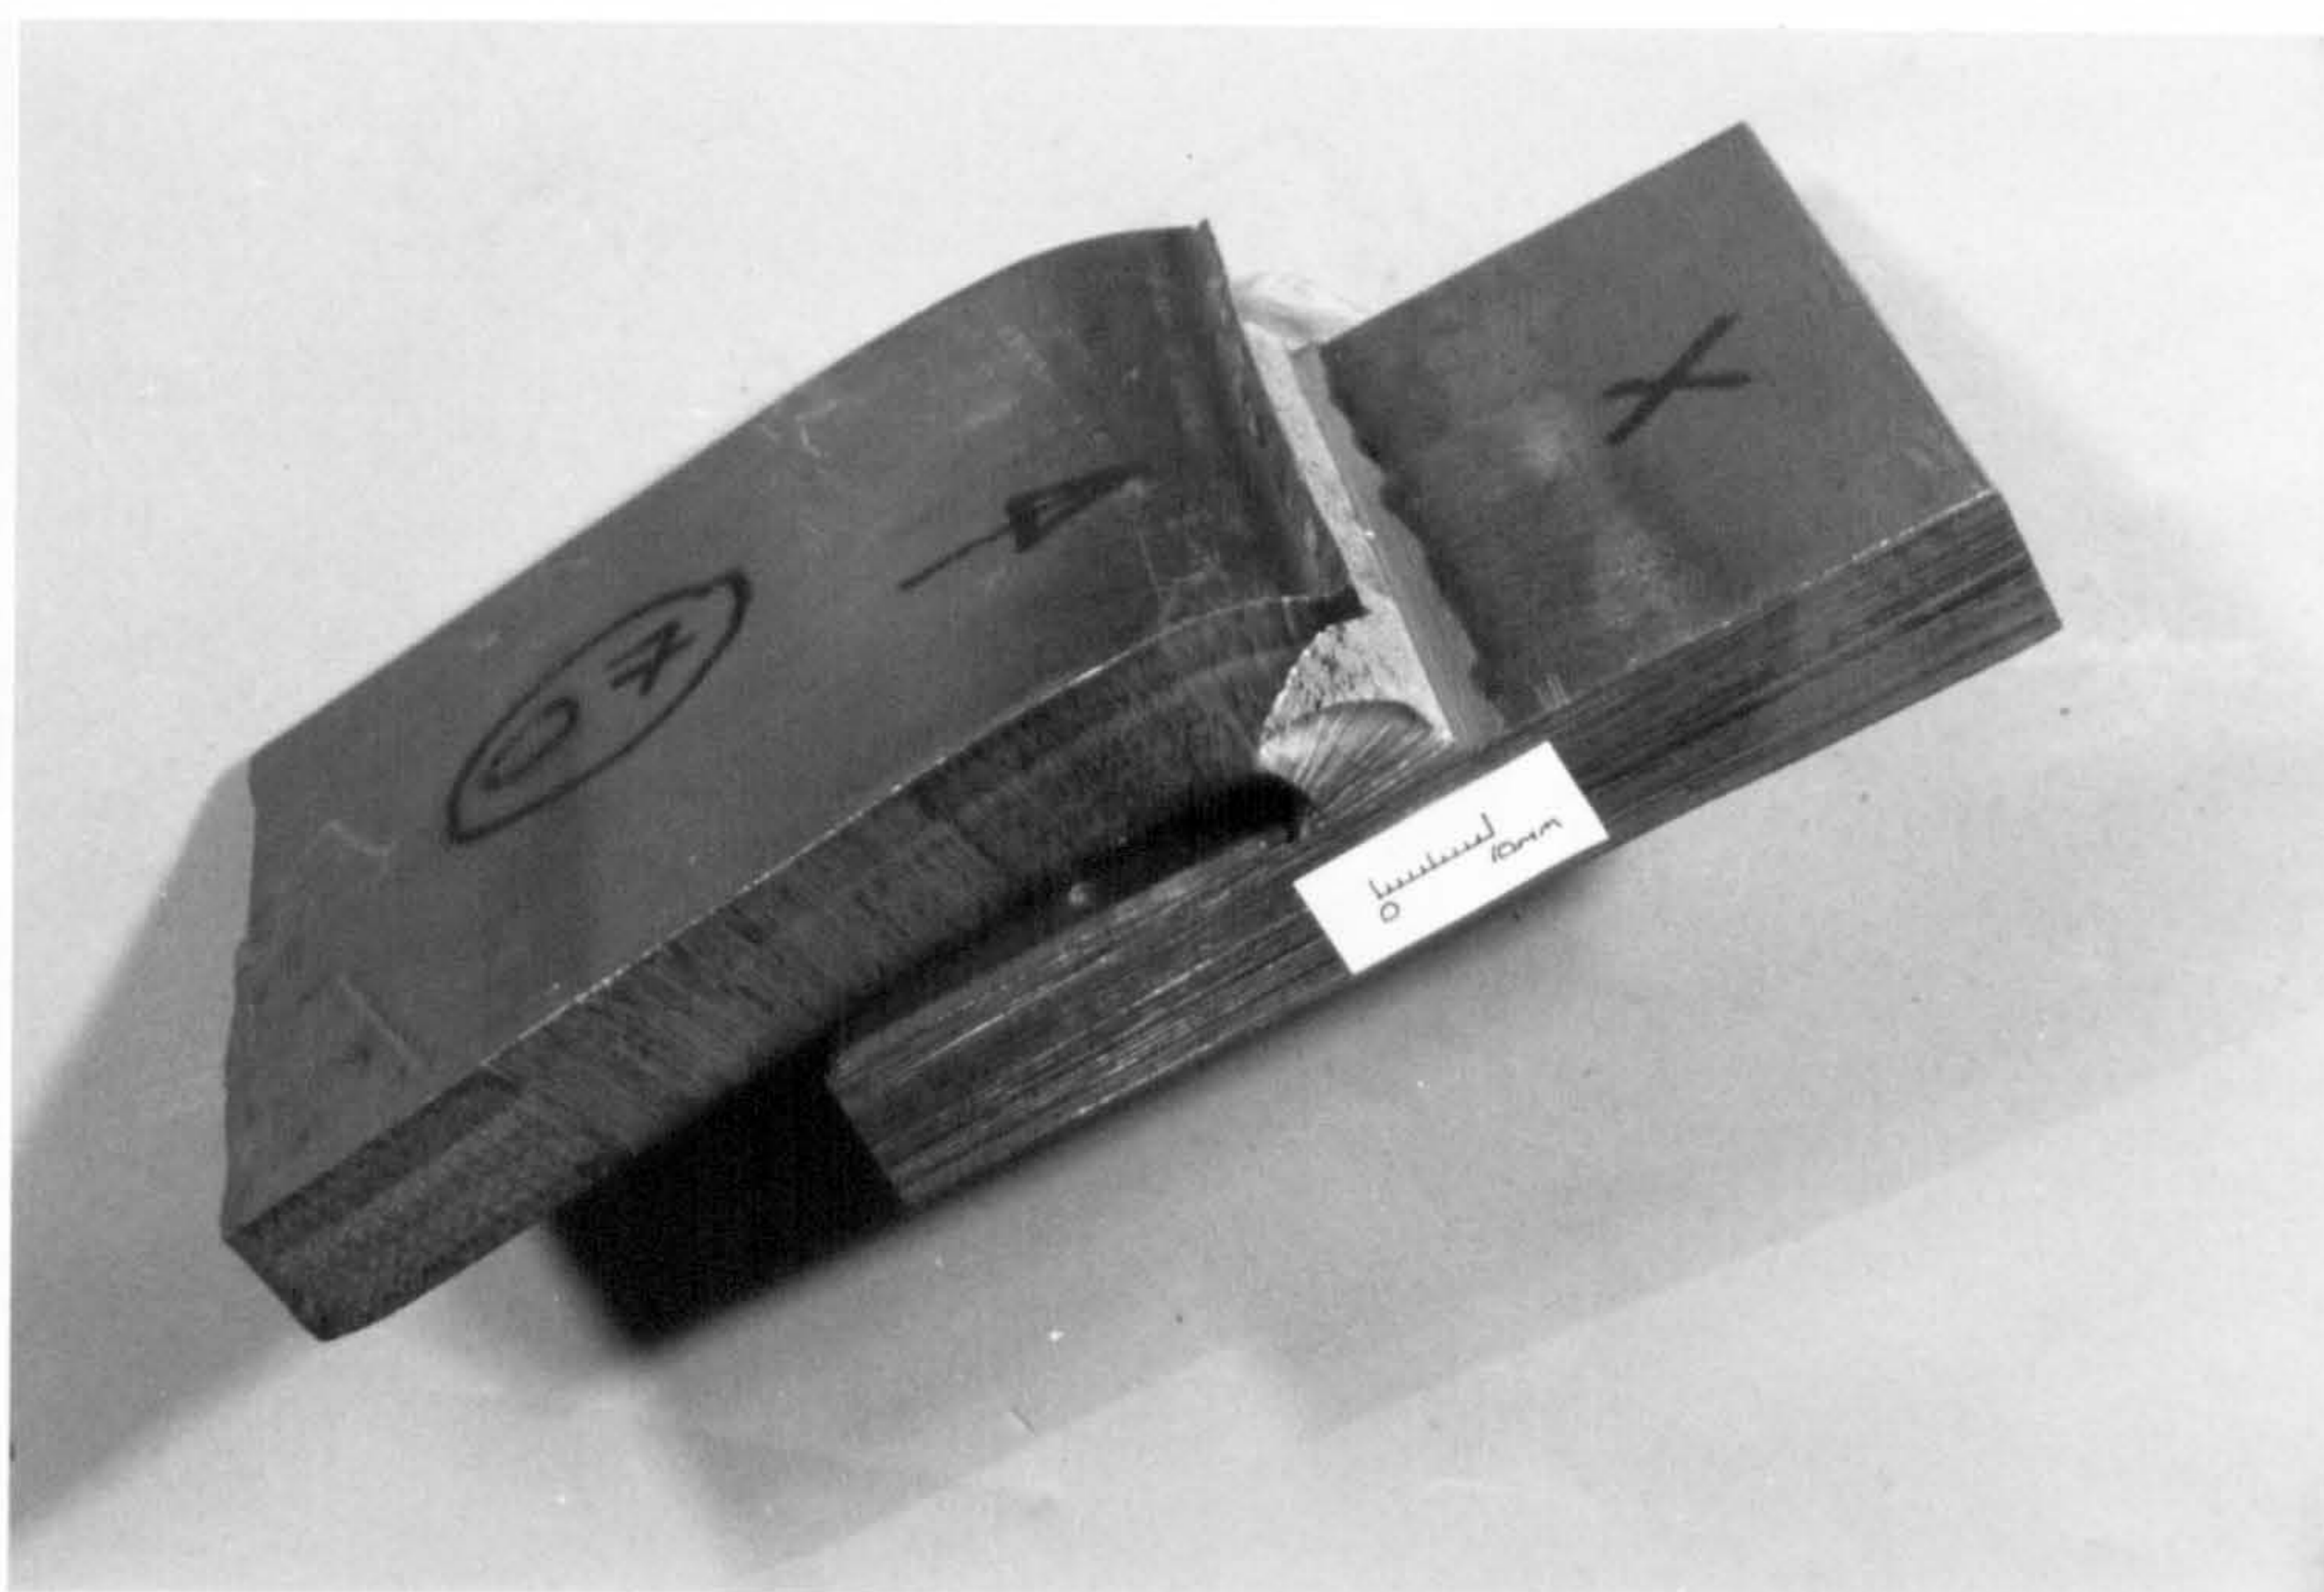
Failure in a fillet fracture from a saw cut notch into the web plate
